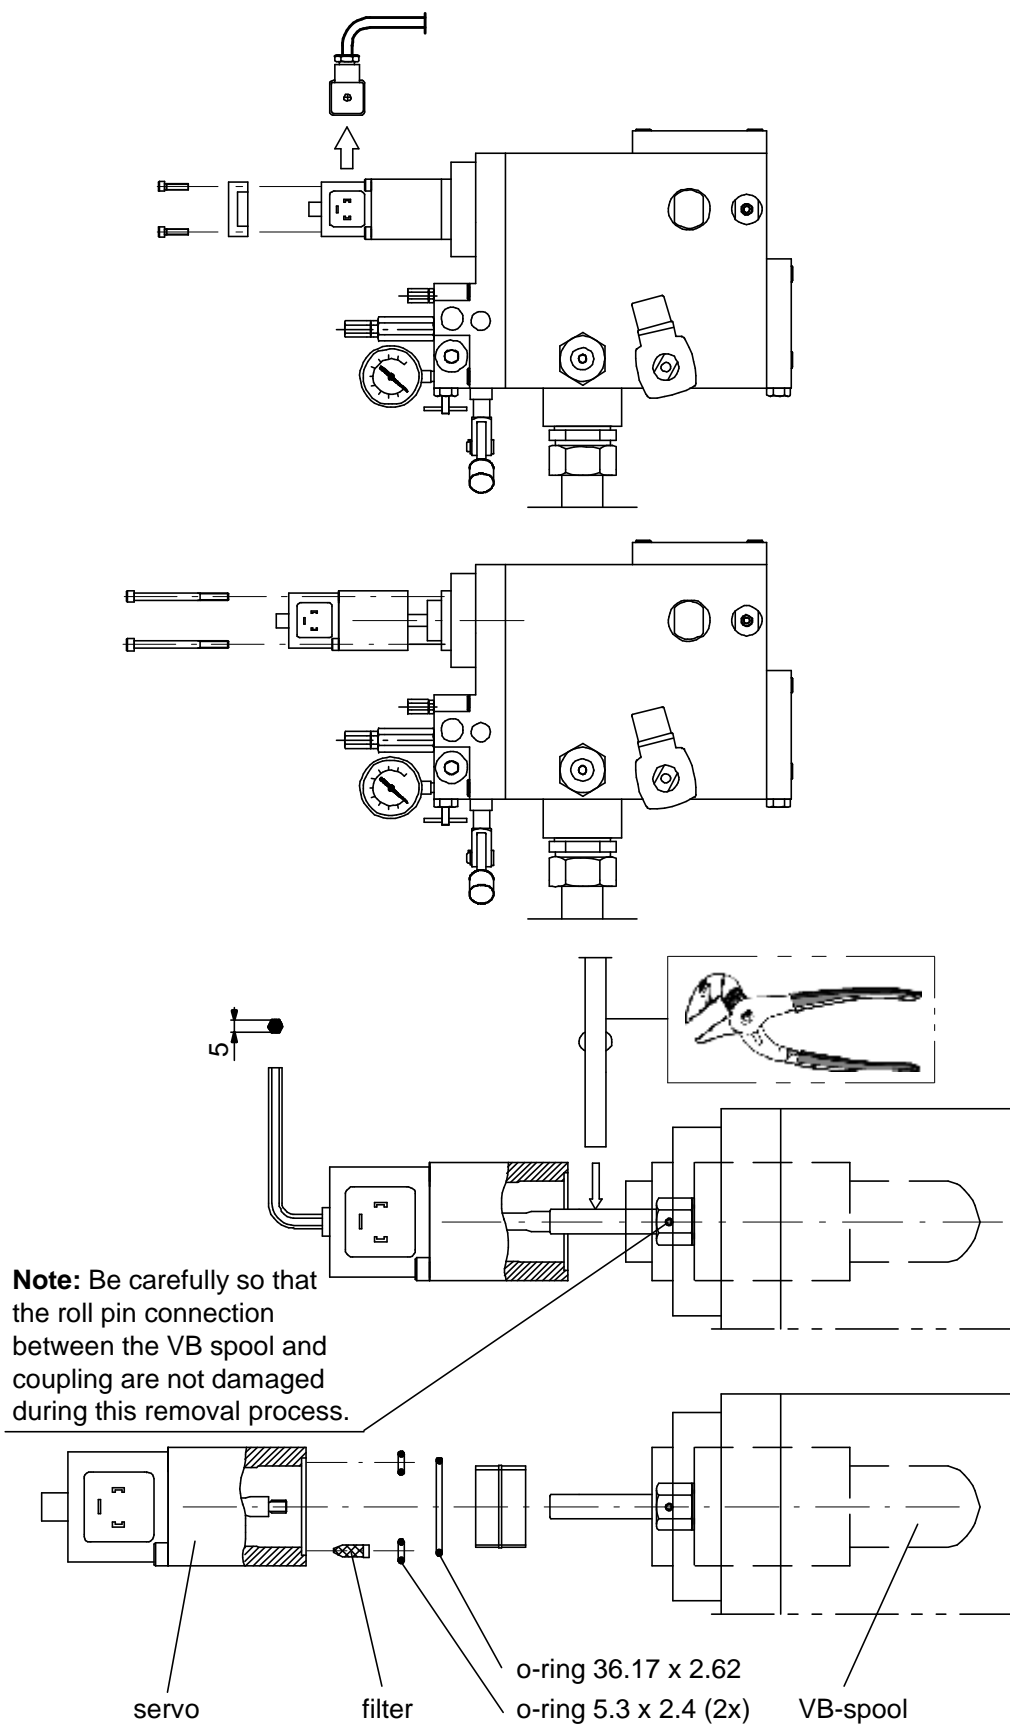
Exchange of servo valve (Valve size 250-600 l/min)
